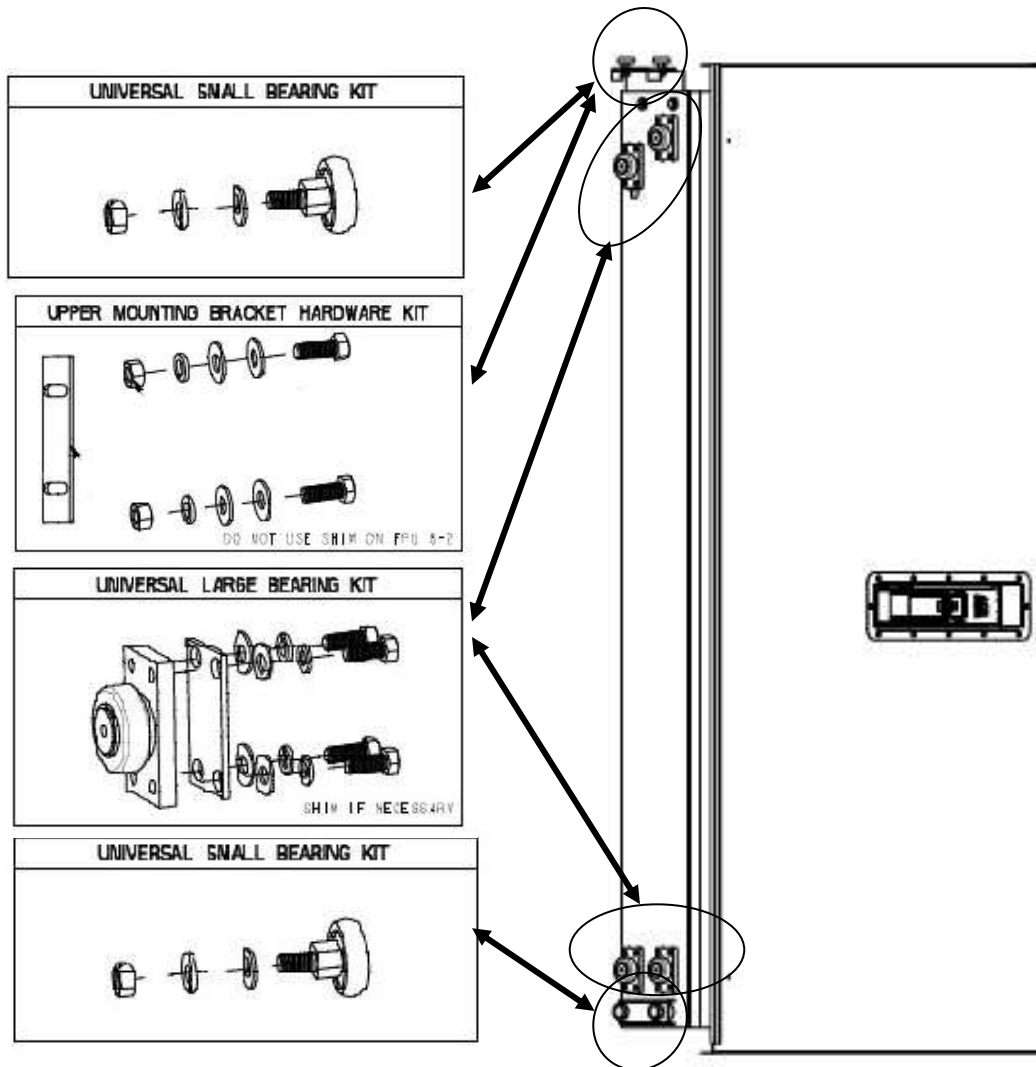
UNIVERSAL BEARING ASSEMBLIES DOOR #1 THRU #10
